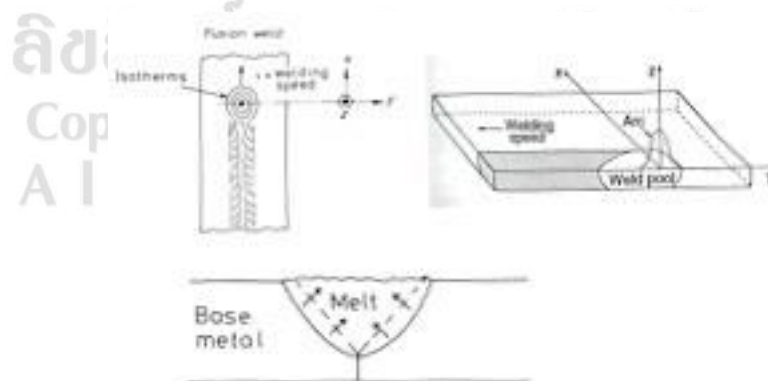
Illustrations of isotherms about the heat sources in fusion welding, the shape of weld beads, the weld pool shape and penetration (after Clarke *et al.* (1999) and Porter and Easterling (2004)).
